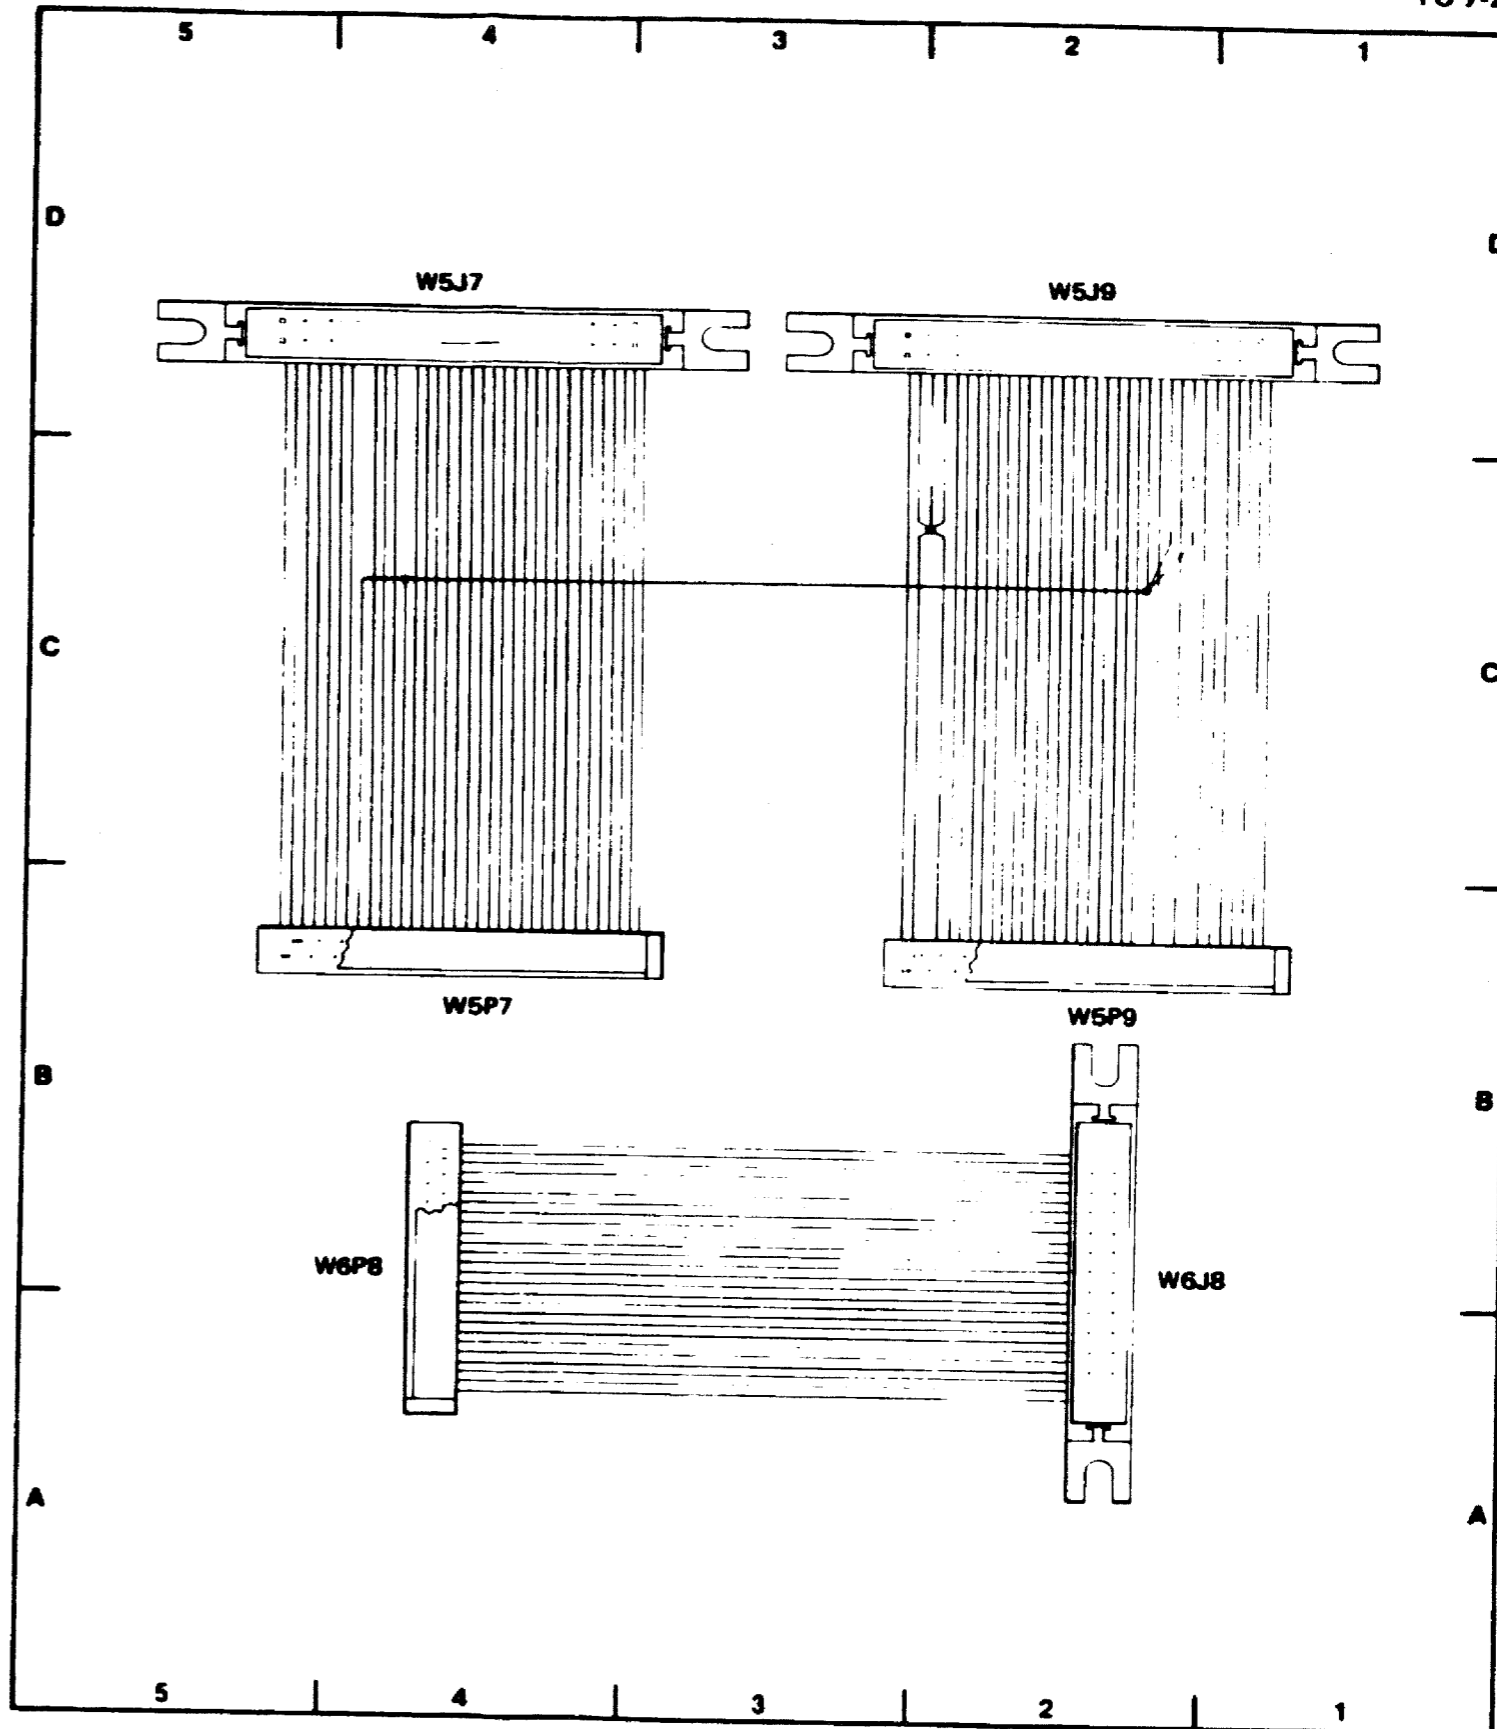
Controller Cable Assembly (Sheet 1 of 2)
